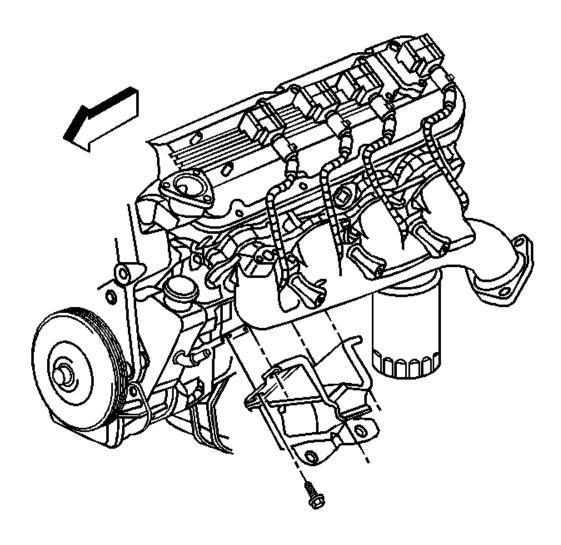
View Of Engine Mount-To-Engine Bolts & Engine Mount Courtesy of GENERAL MOTORS CORP.
